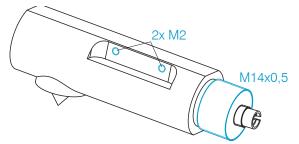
Mounting for series IFS2407/90-0,3 sensors
